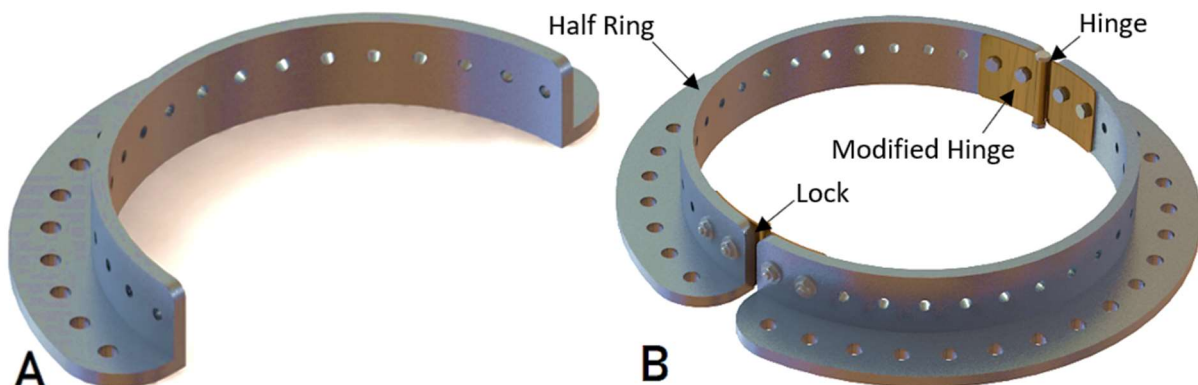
Concept 1 – (A) The segmented half ring of the L-jointed fixator ring assembly (B) A full completed assembly of the L-jointed ring with opposing and mirrored hinges, that assembled together would form the ring's mechanical structure.
